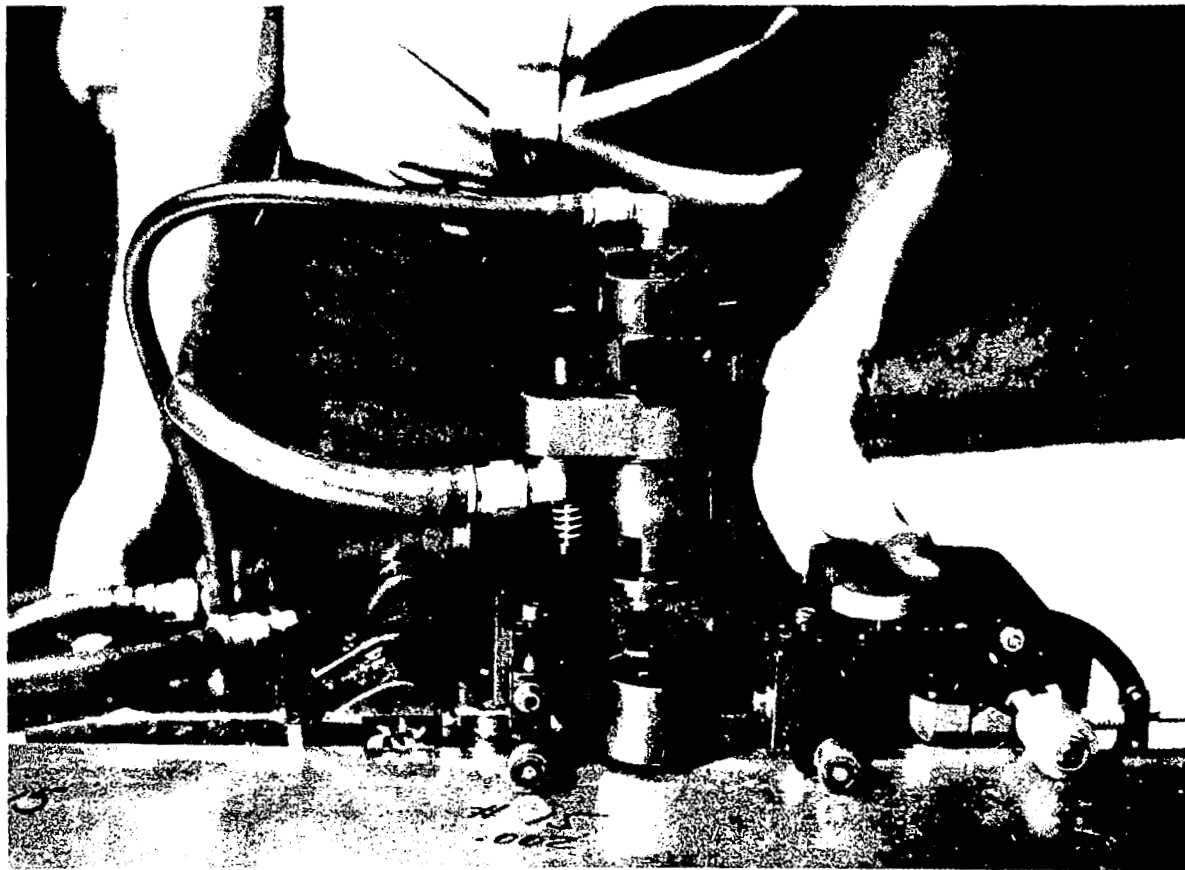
Method for holding device on plate for preparing surfaces in down-hand welding position.
